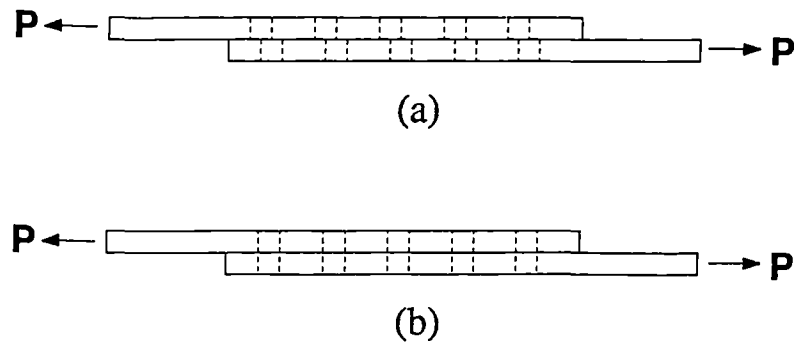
Deflections in a bolted joint with (a) rigid sheets and (b) rigid bolts
